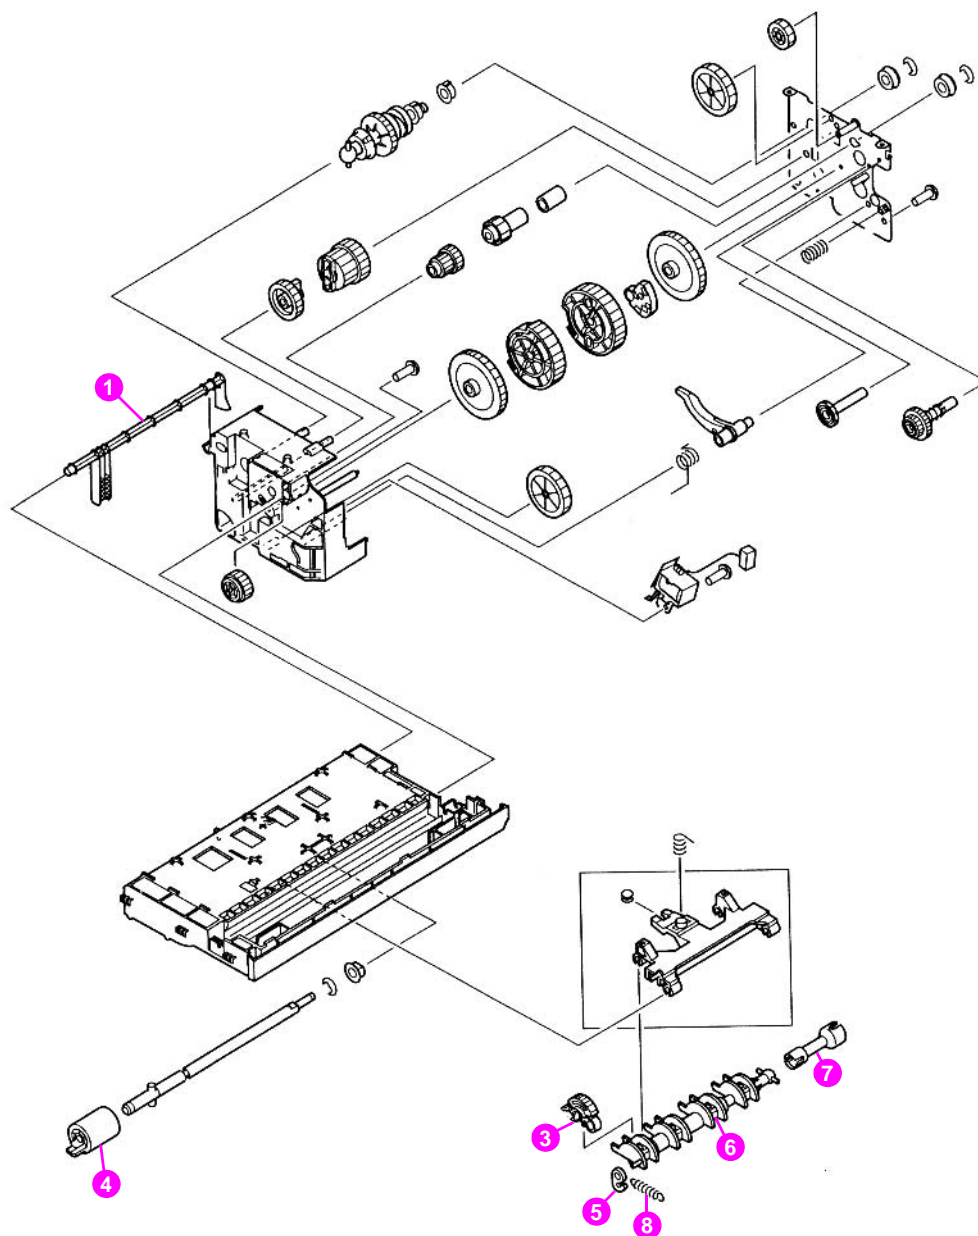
Paper pickup guide assembly of optional 500-sheet feeder
